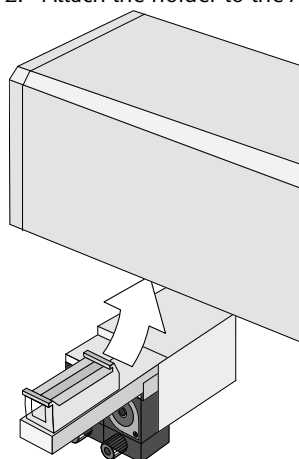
Attaching the Pump Holder Bracket to the X-Axis.
